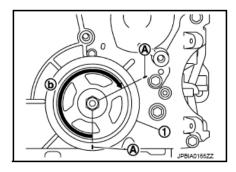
Rotating Crankshaft 240 Degrees Courtesy of NISSAN MOTOR CO., U.S.A.
